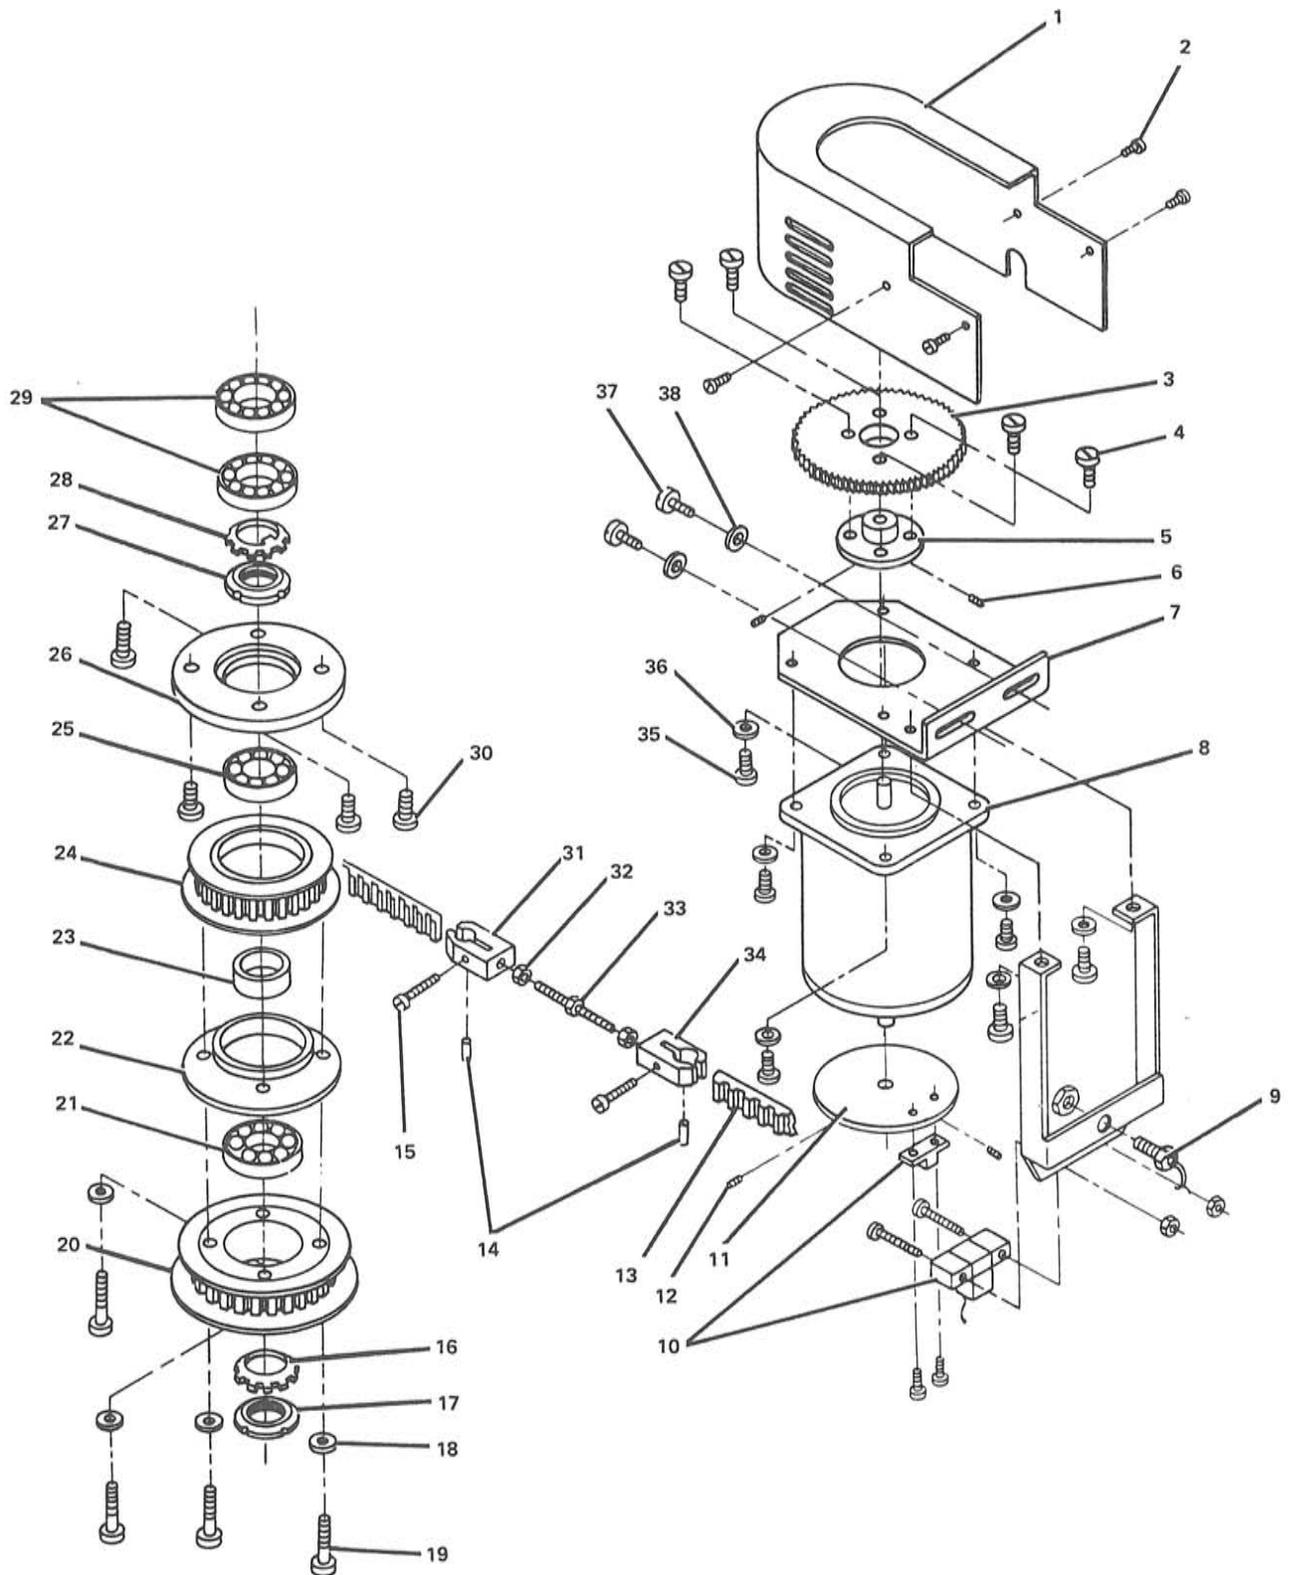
ROLL MOTOR AND DRIVE ASSEMBLY. SEE LIST 6.
